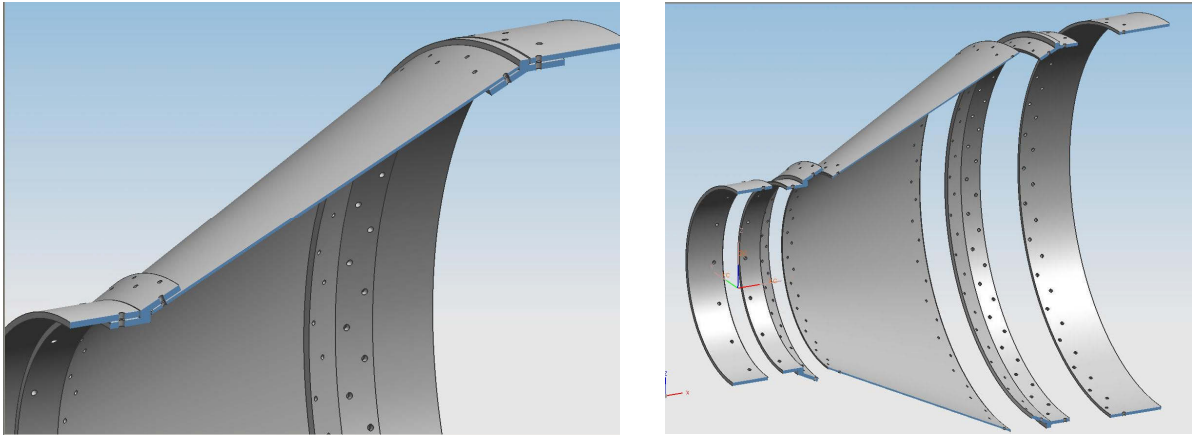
(a) Completed assembly (b) exploded section view of completed assembly.
